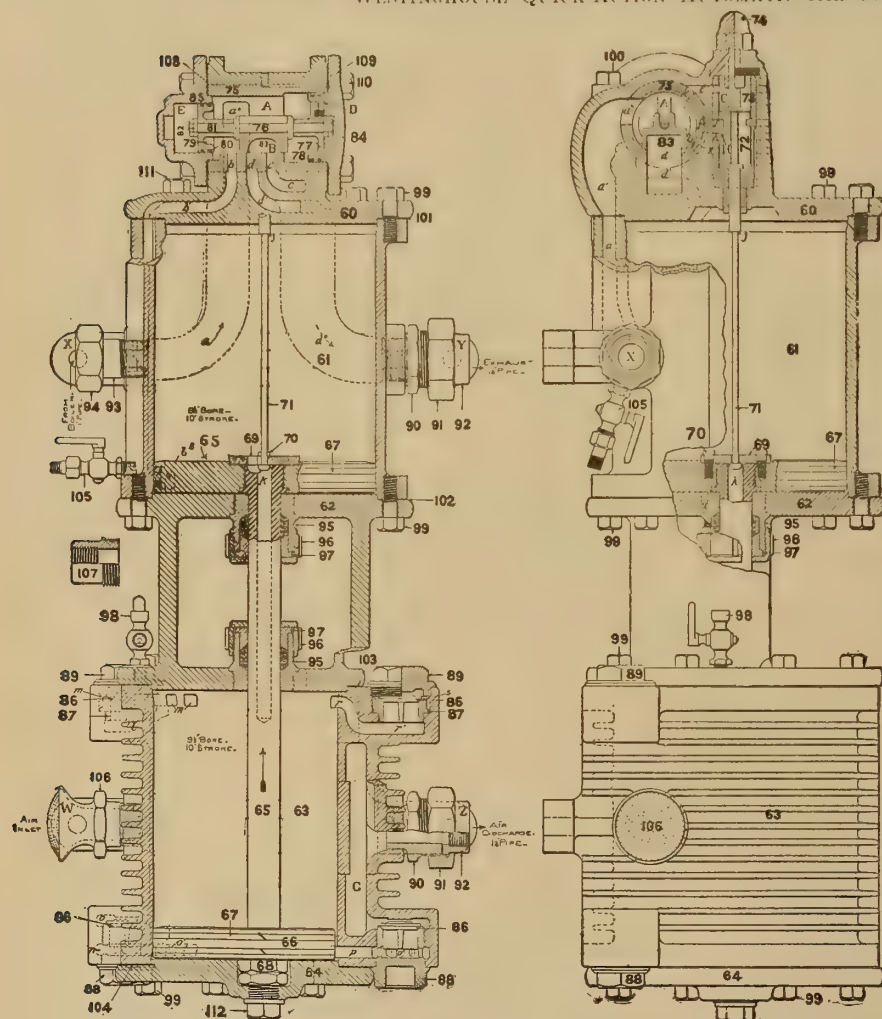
LONGITUDINAL SECTION. FIG. 894. CROSS SECTION.
